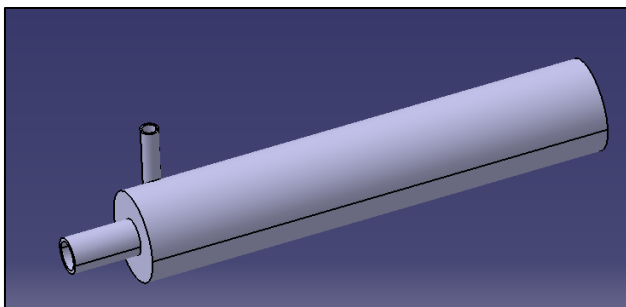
CATIA and drafting for different inlet geometry for vortex tube
